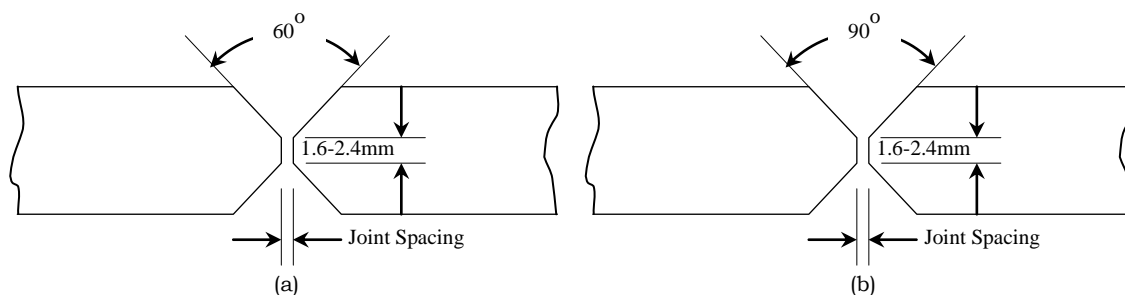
Typical joint geometry used for GTAW of aluminum components. Source: American Welding Society.
